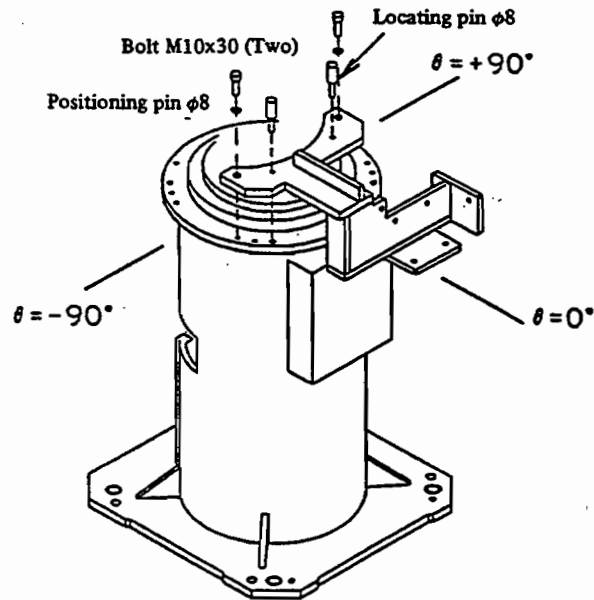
(b) Mounting on robot body (S-10)
